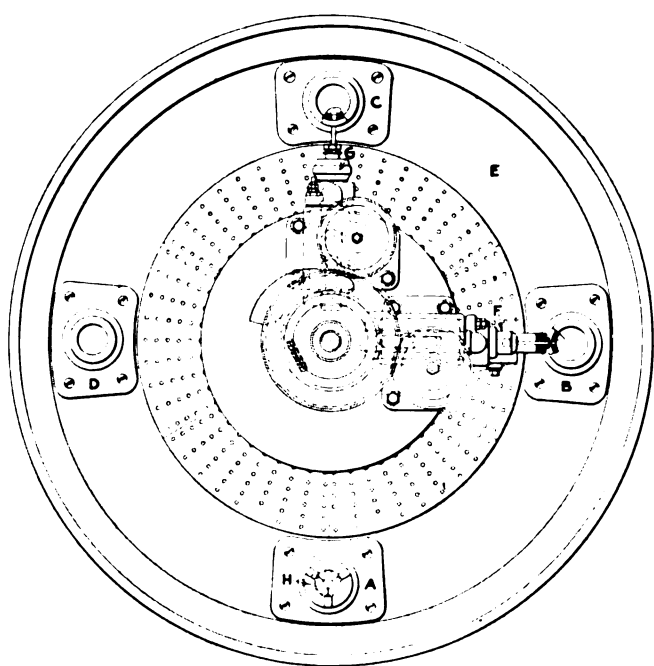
PLAN VIEW OF DRILLING MACHINE
